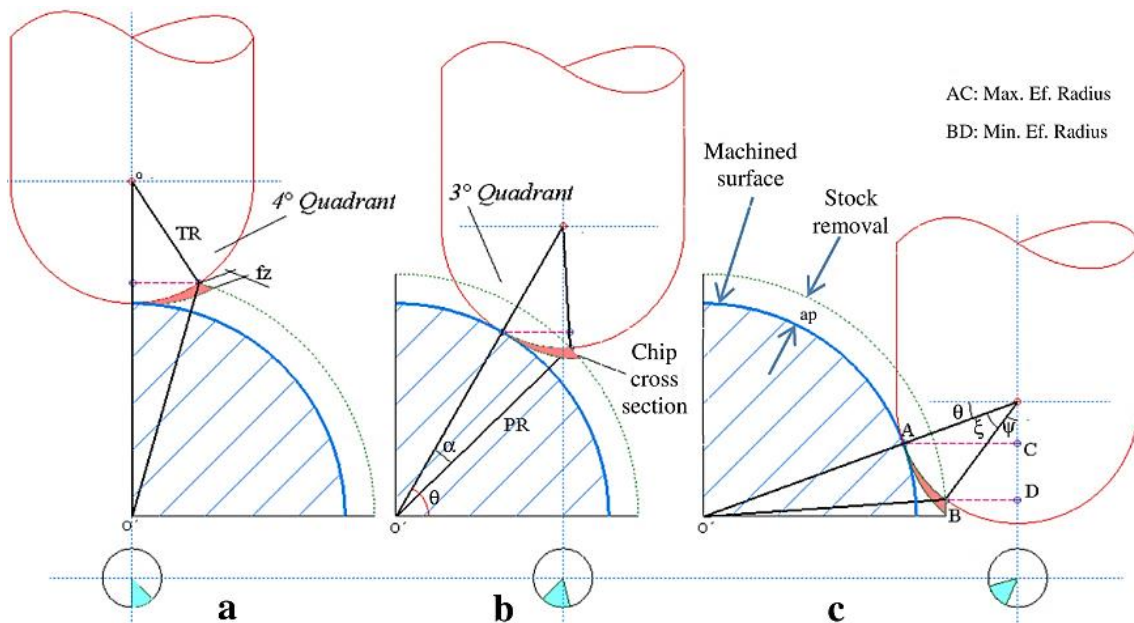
Alterations of the tool contact and effective cutting radii in 3-axis ball-end milling of a half cylinder (de Souza et al., 2015).
